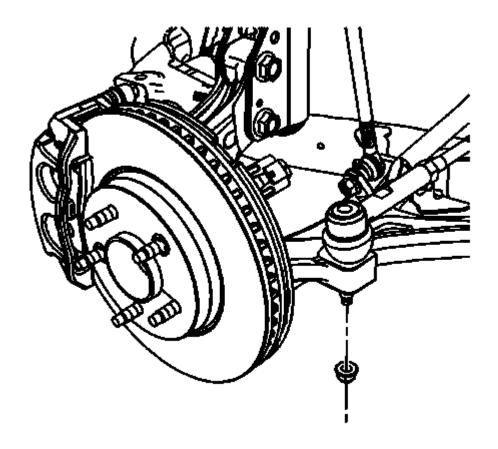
Outer Tie Rod To Steering Knuckle Nut Courtesy of GENERAL MOTORS COMPANY
